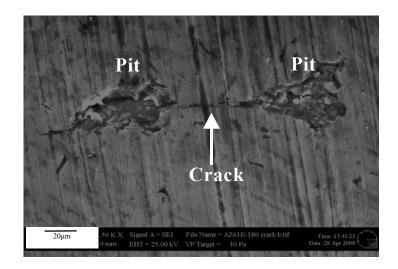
Crack emanating from cutting pits observed on specimen surface of EDM as-cut sample ( $\sigma_{max}$ =180 MPa)
